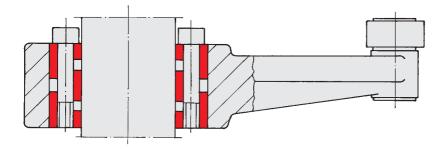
Rocker arm fixture. The peripheral and axial position can be ideally adjusted during assembly.
